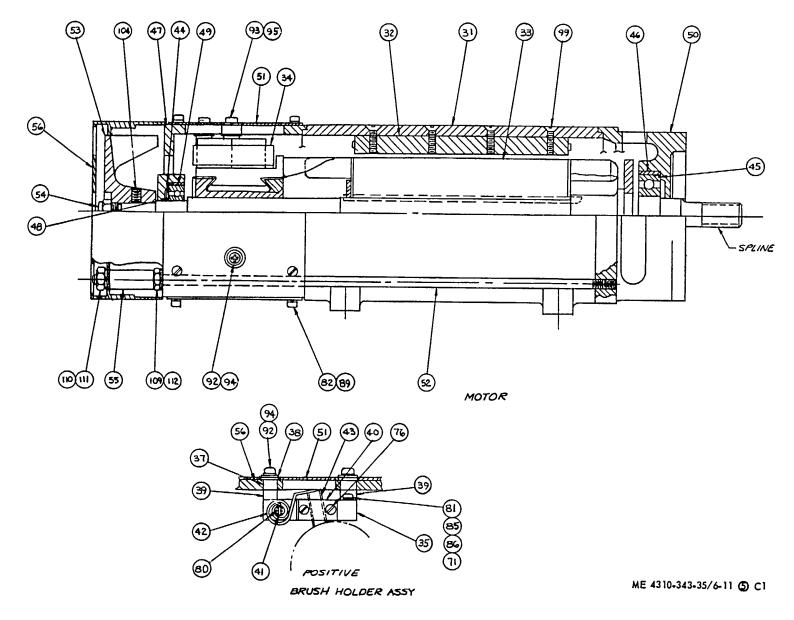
Motor-compressor assembly, Bogue Electric model 6703). (sheet 5 of 5)
